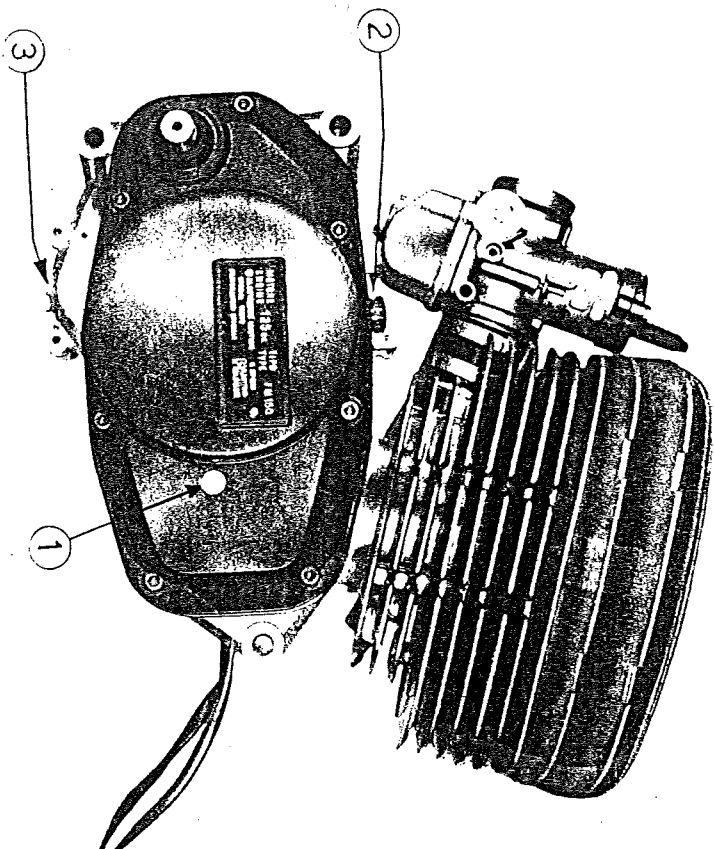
Oil level - 2 Oil filler - 3 Oil drain
